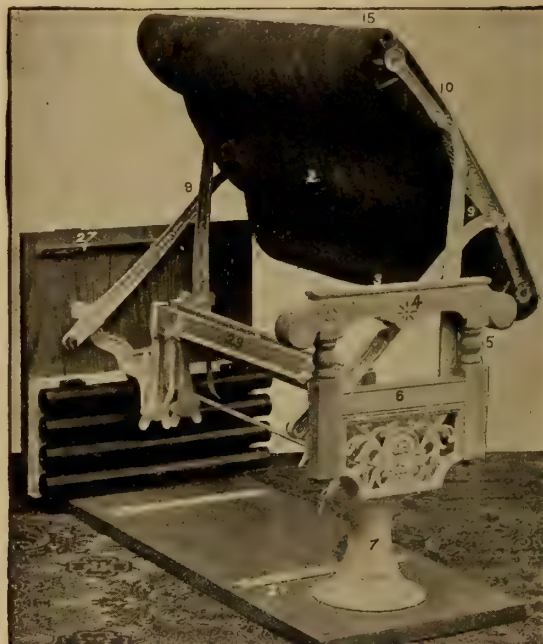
EXTRA HIGH BACK SEAT. TILTED TO SHOW MECHANICAL PARTS.
